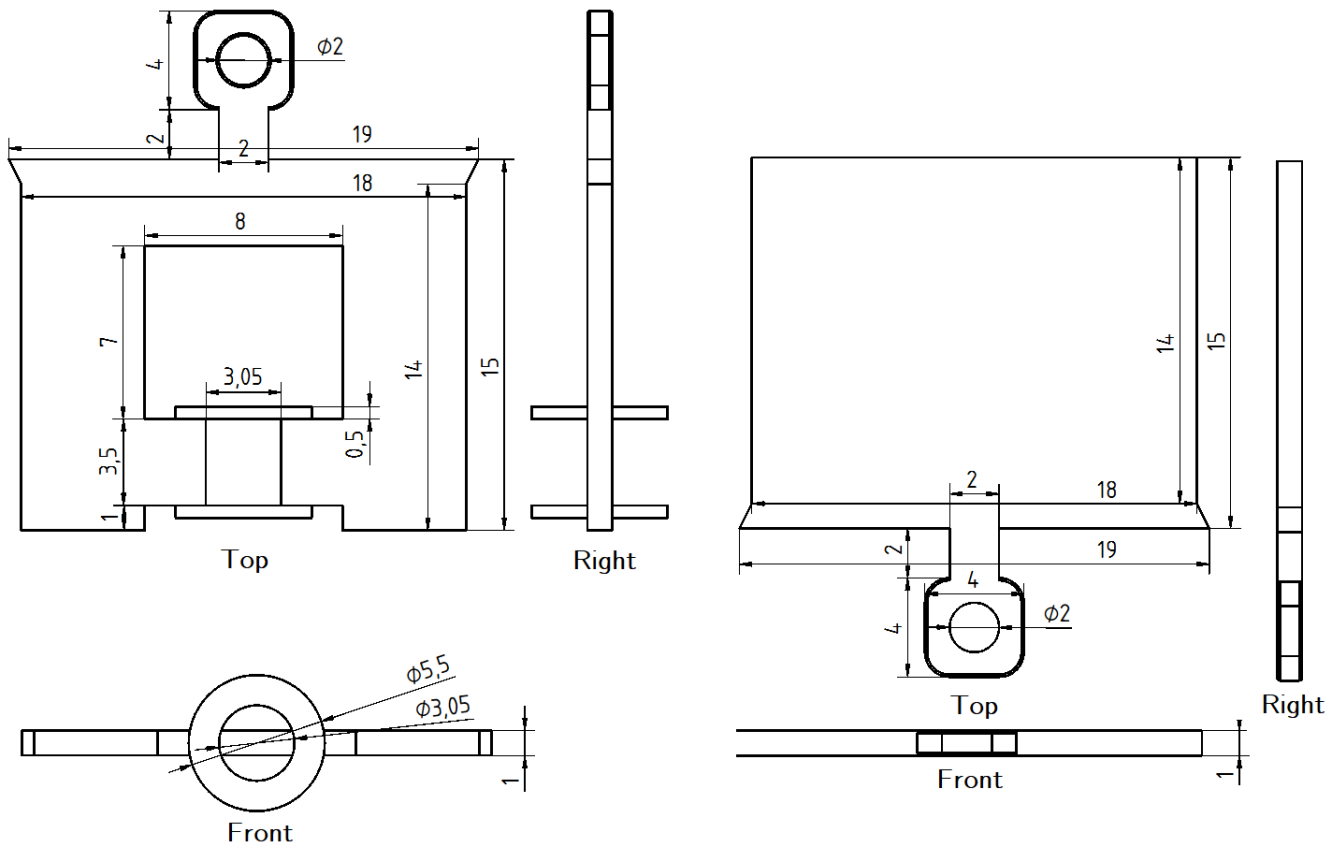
Technical drawing of the current holder bulk holder (left), and substrate holder (right). Units of length are in millimeters.
